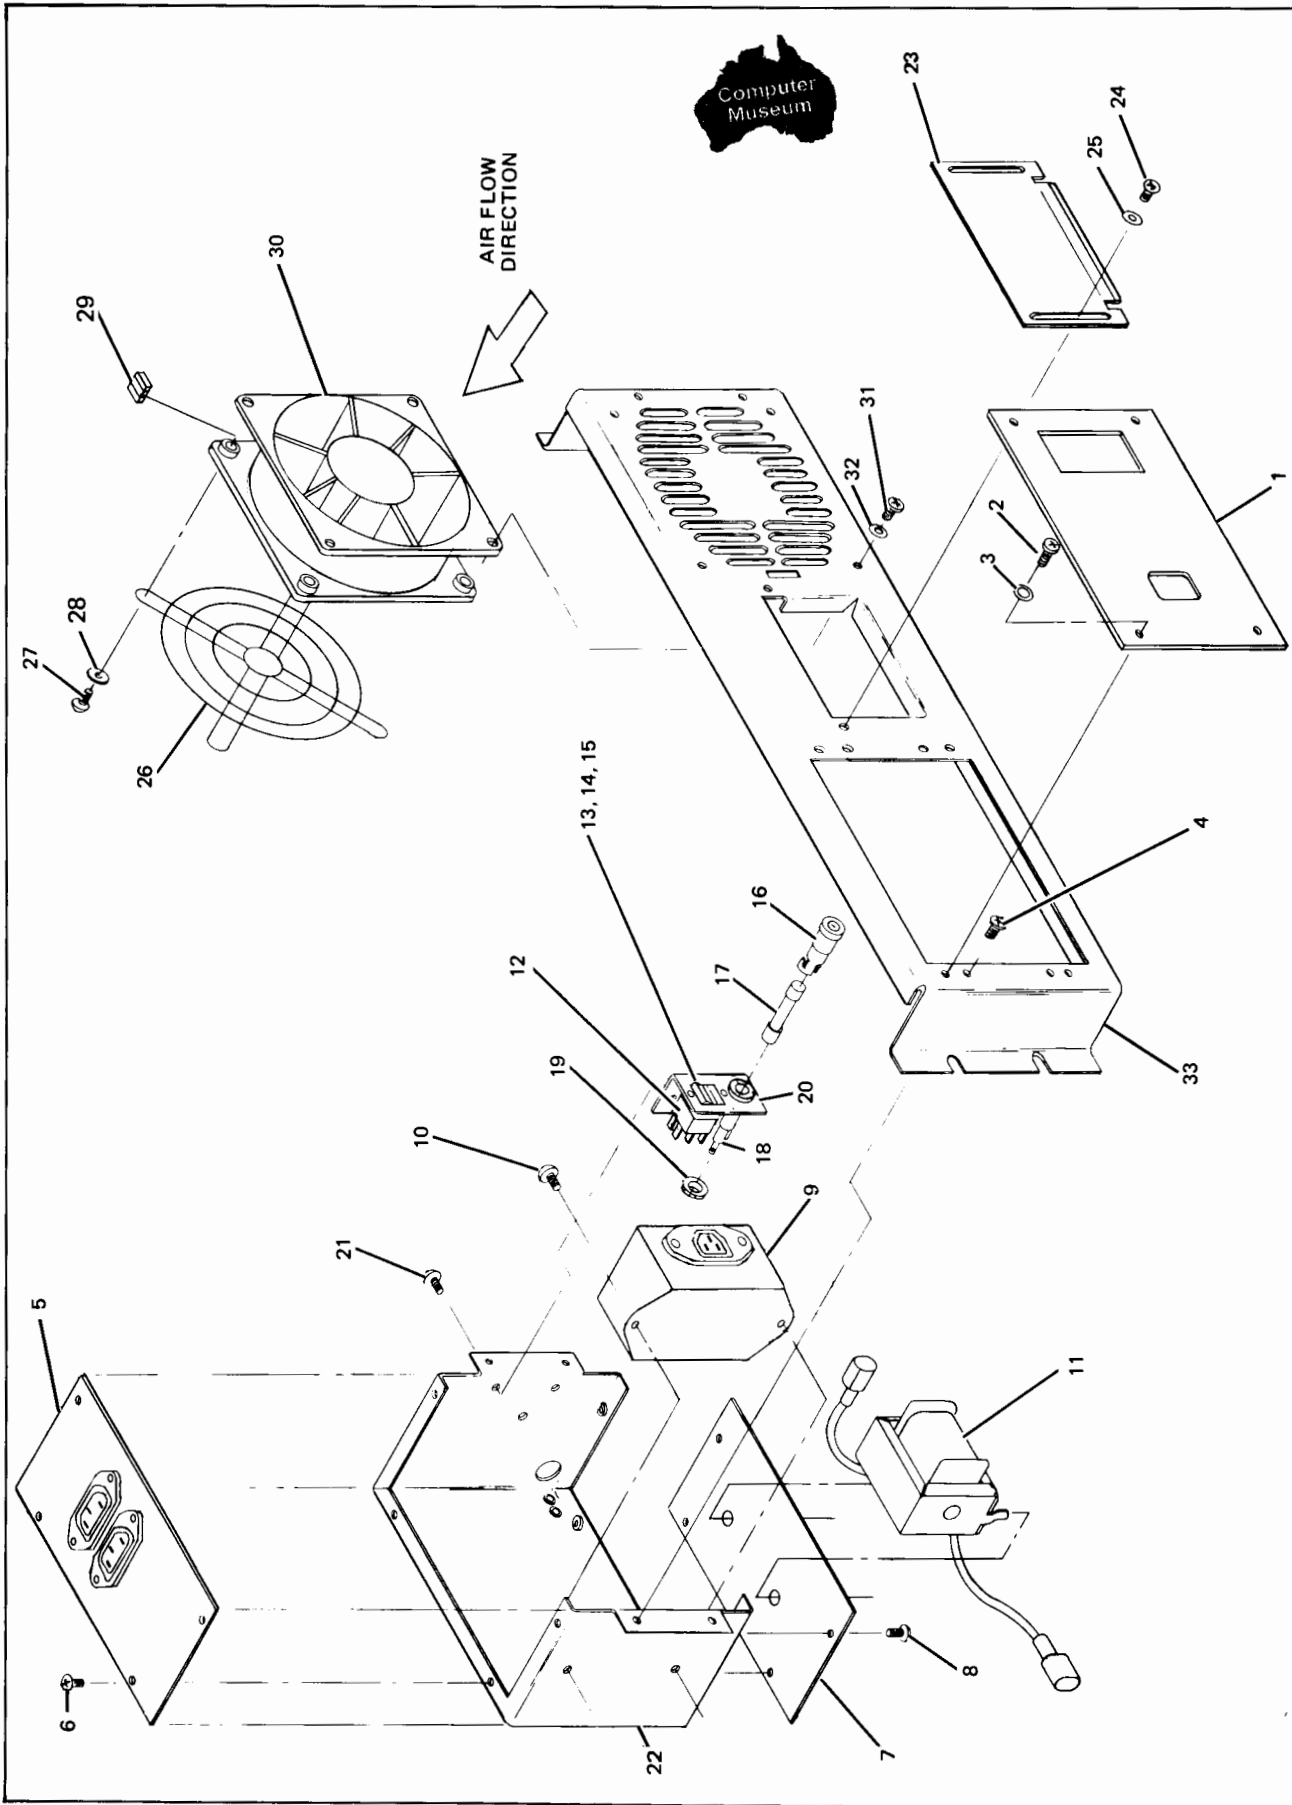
Power Panel Assembly (Part no. 29425-60009 and 29425-60010), Exploded View
